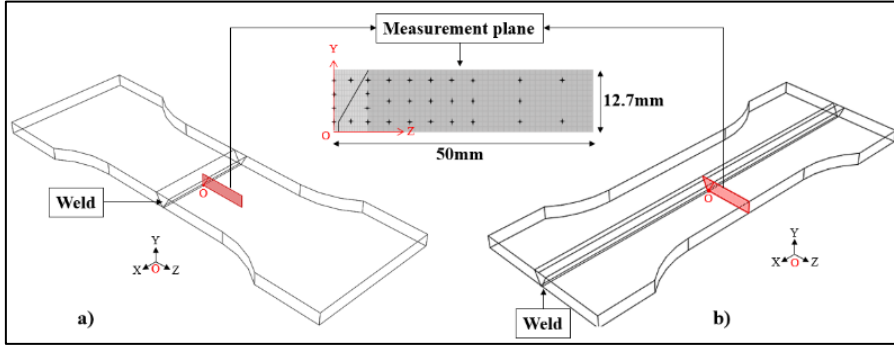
Illustration of 30 measurement points on butt welded plates: a) Butt-welded plate with the short weld and, b) butt-welded plate with the long weld.
